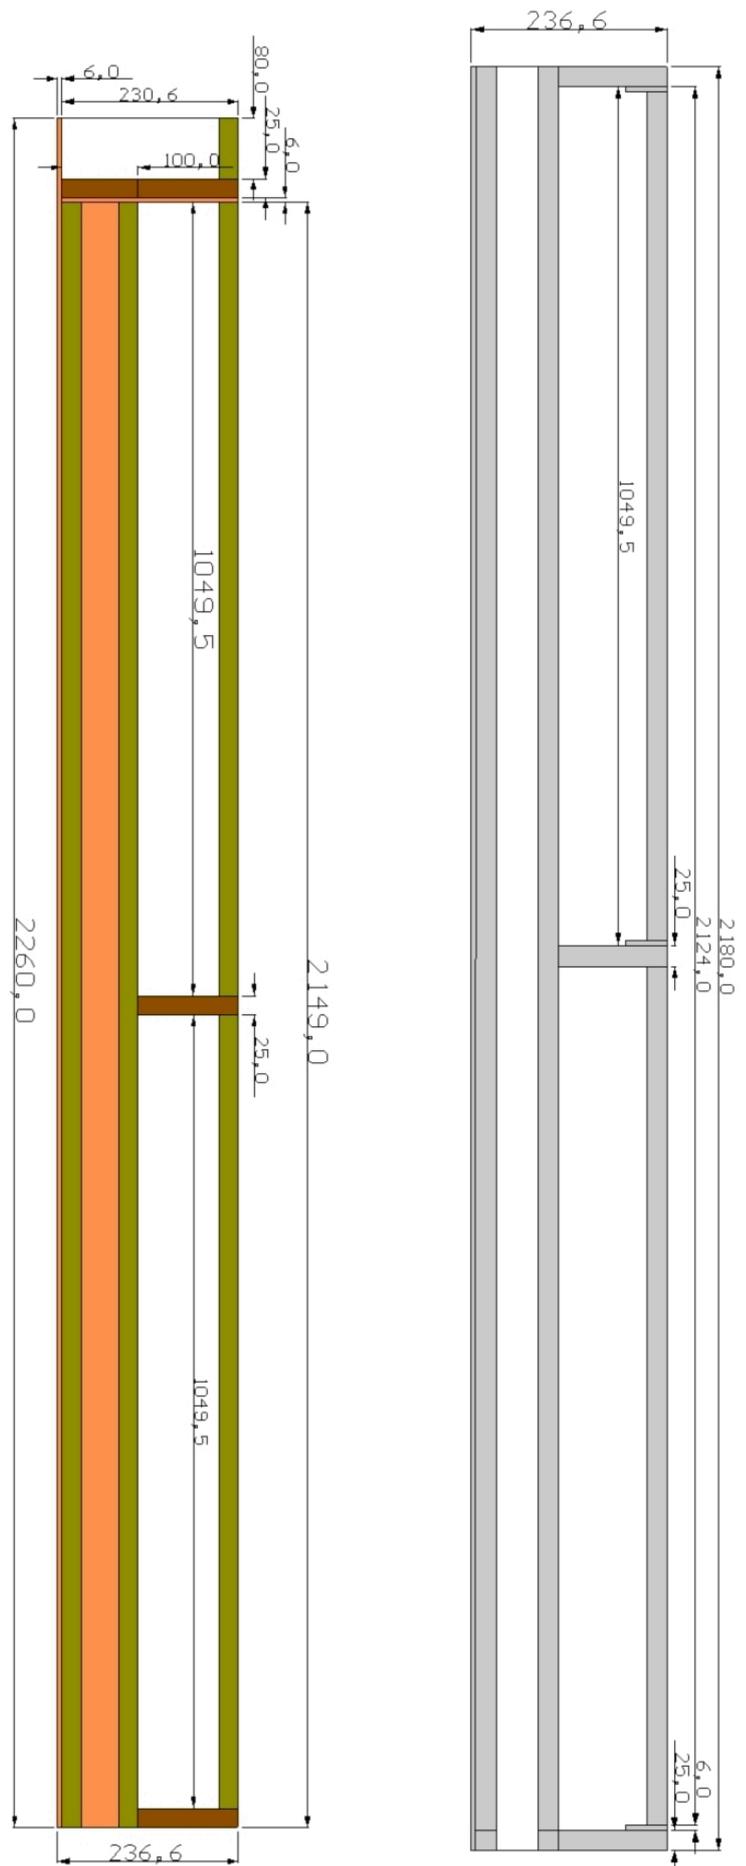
(right): The chassis for the drying section carries the mosquito mesh only, to reduce the resistance to the air flow. Dimensions in mm.
